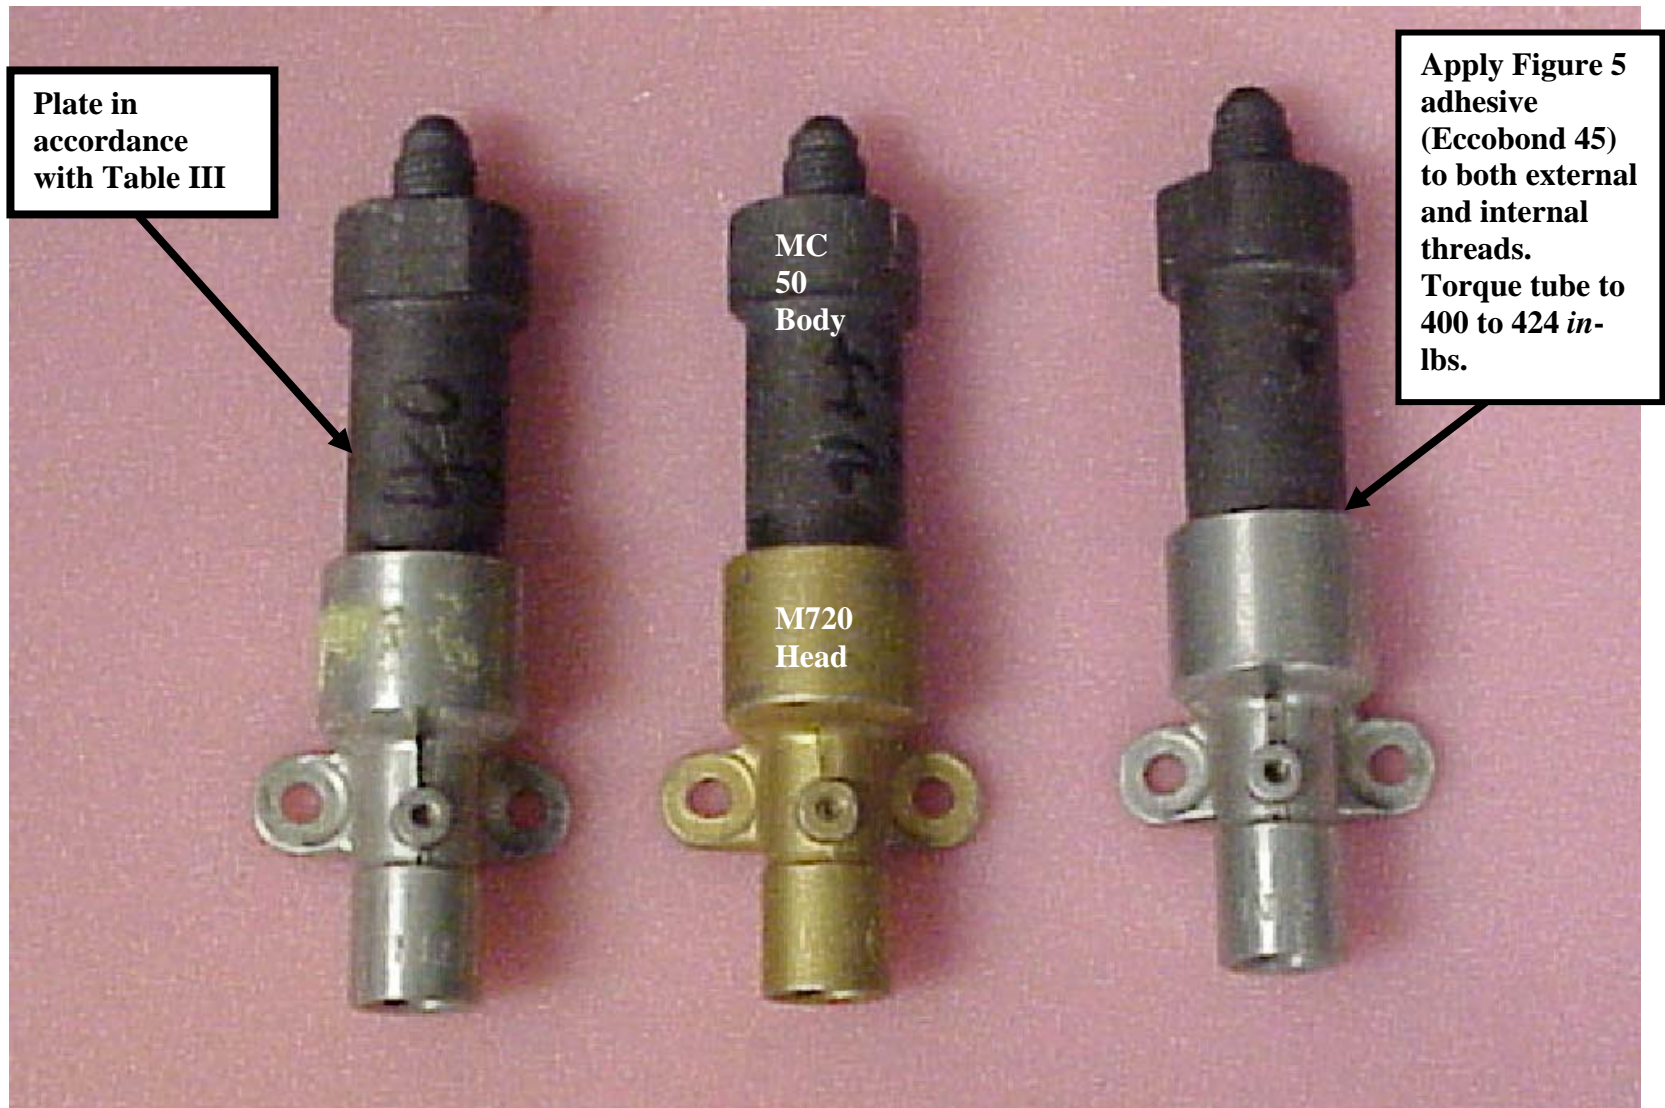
PAD MK 74 Manifold Tube Torque Test Item
